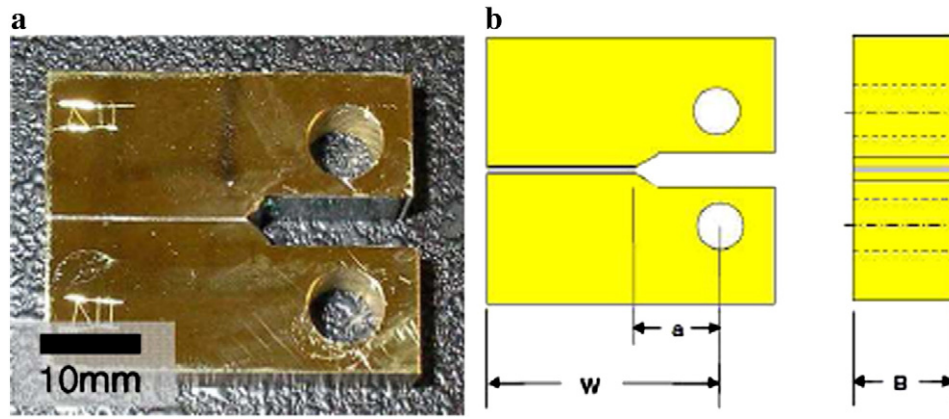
(a) Macro view of CT specimen. (b) CT specimen for the measurement of interfacial fracture toughness $W = 2.54$ cm, $B = 0.953$ cm and $a = 0.8$ cm. [92].
